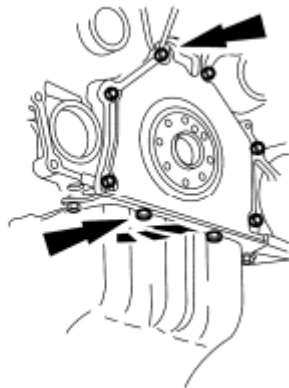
Locating Crankshaft Rear Seal Retainer Plate Bolts
